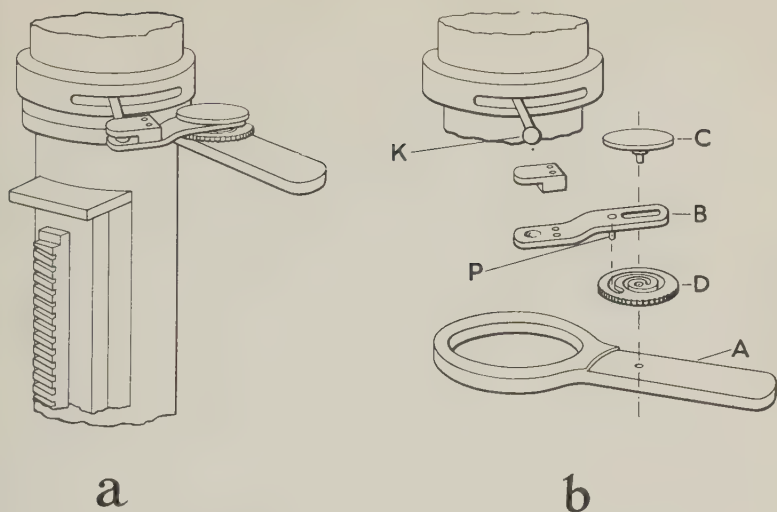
Iris diaphragm device. (a) assembled. (b) "exploded" view.
